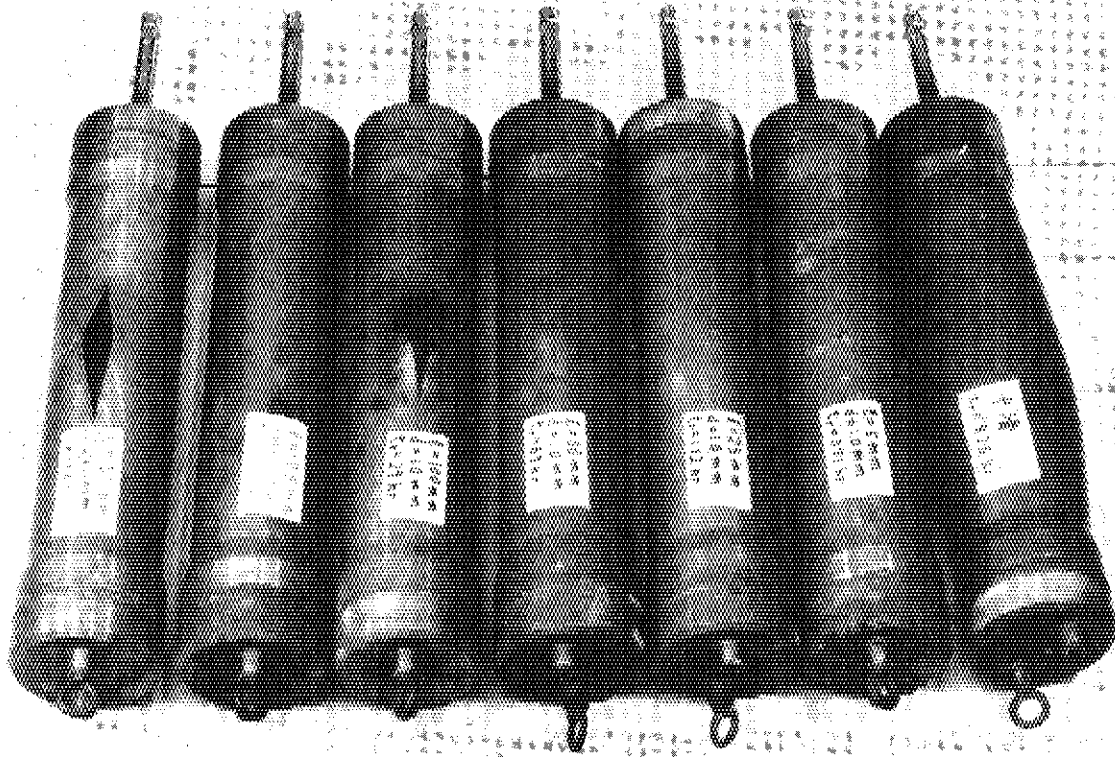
Fracture Appearance of Tubes Containing Axial Notch
